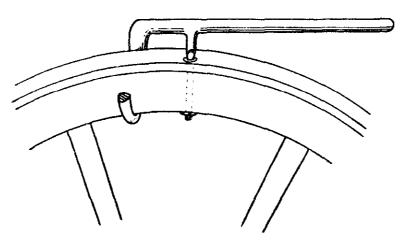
TOOL FOR HOLDING TIRE BOLTS
